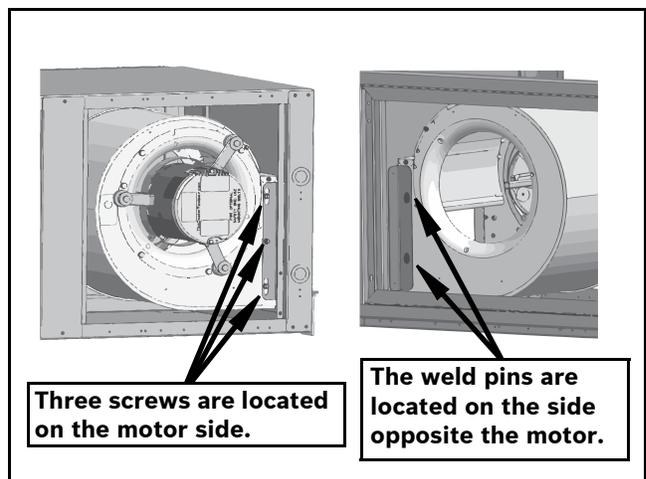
Screws and Welded Pins Locations for Horizontal Units
